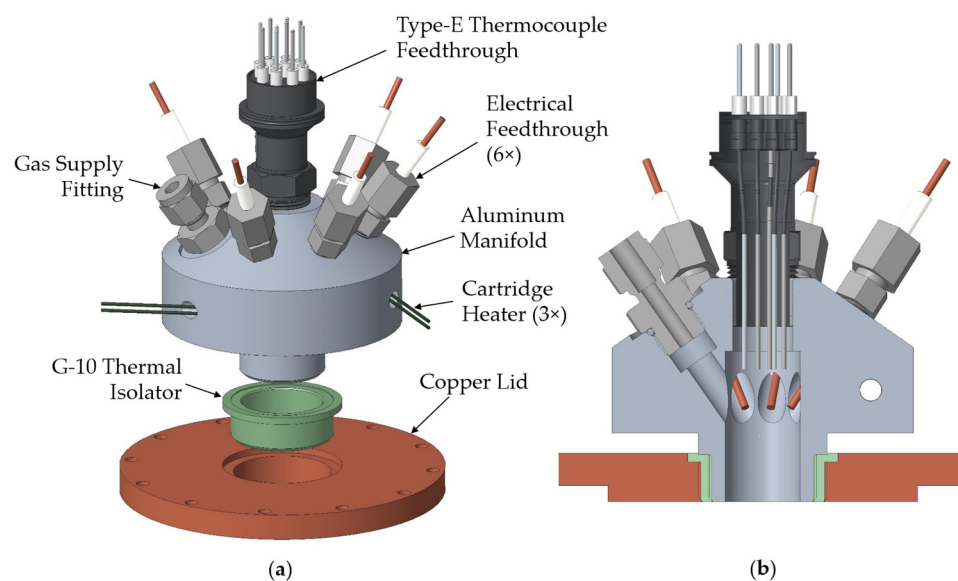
CAD models of the lid and feedthrough interface: (a) exploded view showing major components; (b) cut-away showing interior details (right).
